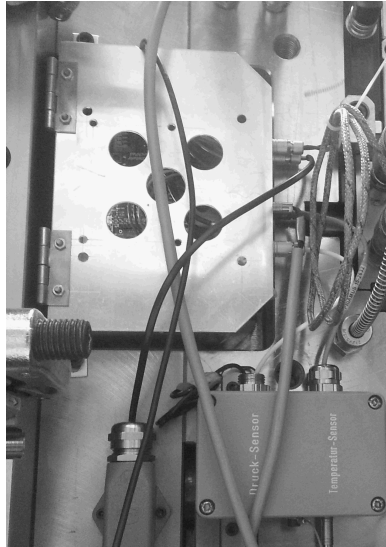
Photograph of the measurement hardware (EDS) integrated into the injection moulding tool.
